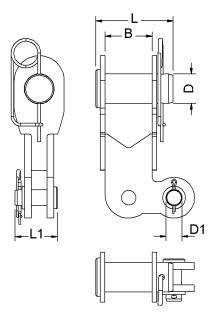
Dimensions of backstay strap connector on 1507 fixed jib
